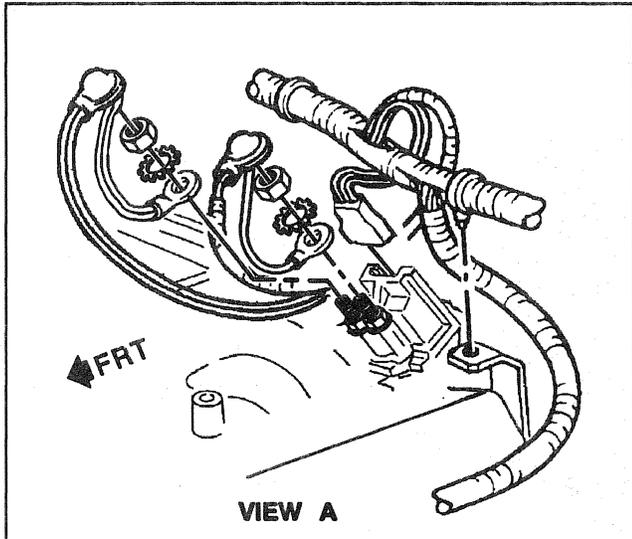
Engine Wiring - Left Side Views (6.5L Diesel Engines)
